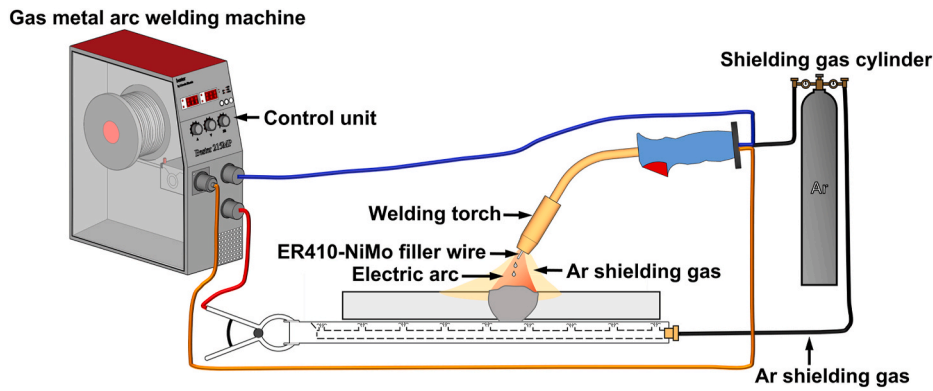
Schematic of the gas metal arc welding set-up used in this work.
